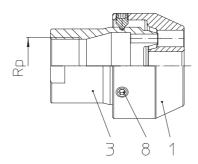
Steam injector - series 651 PN25 (internal thread Rp 1 - 1 1/2
